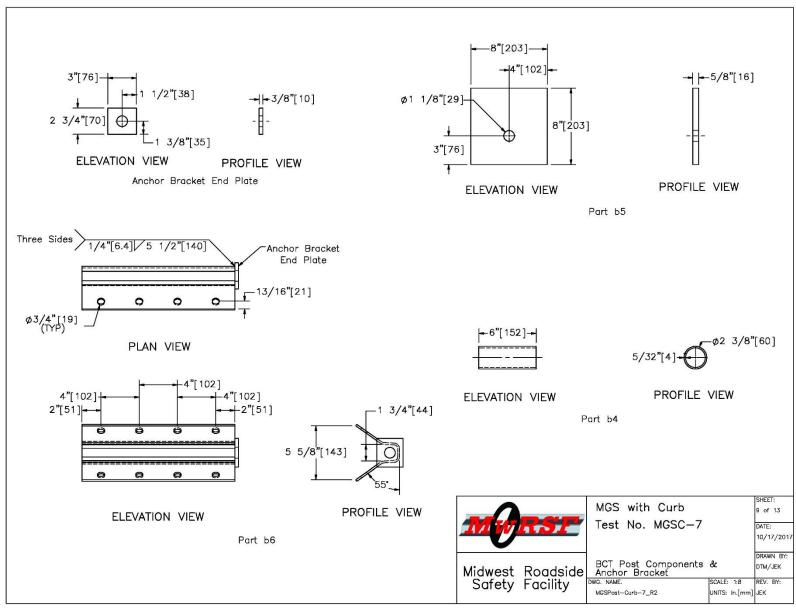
BCT Post Components and Anchor Bracket, Test No. MGSC-7
